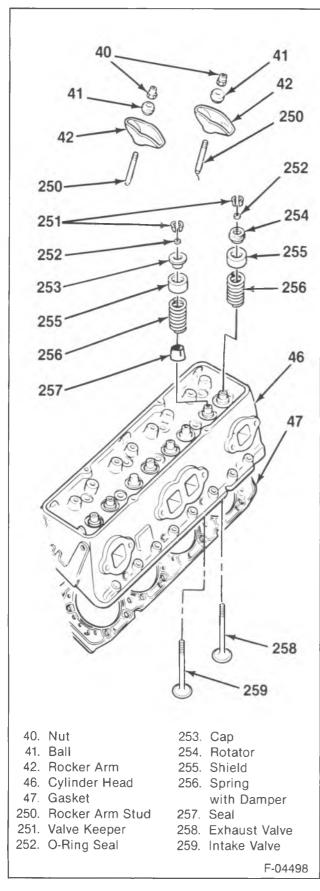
Cylinder Head and Components (5.0L and 5.7L Engines)
